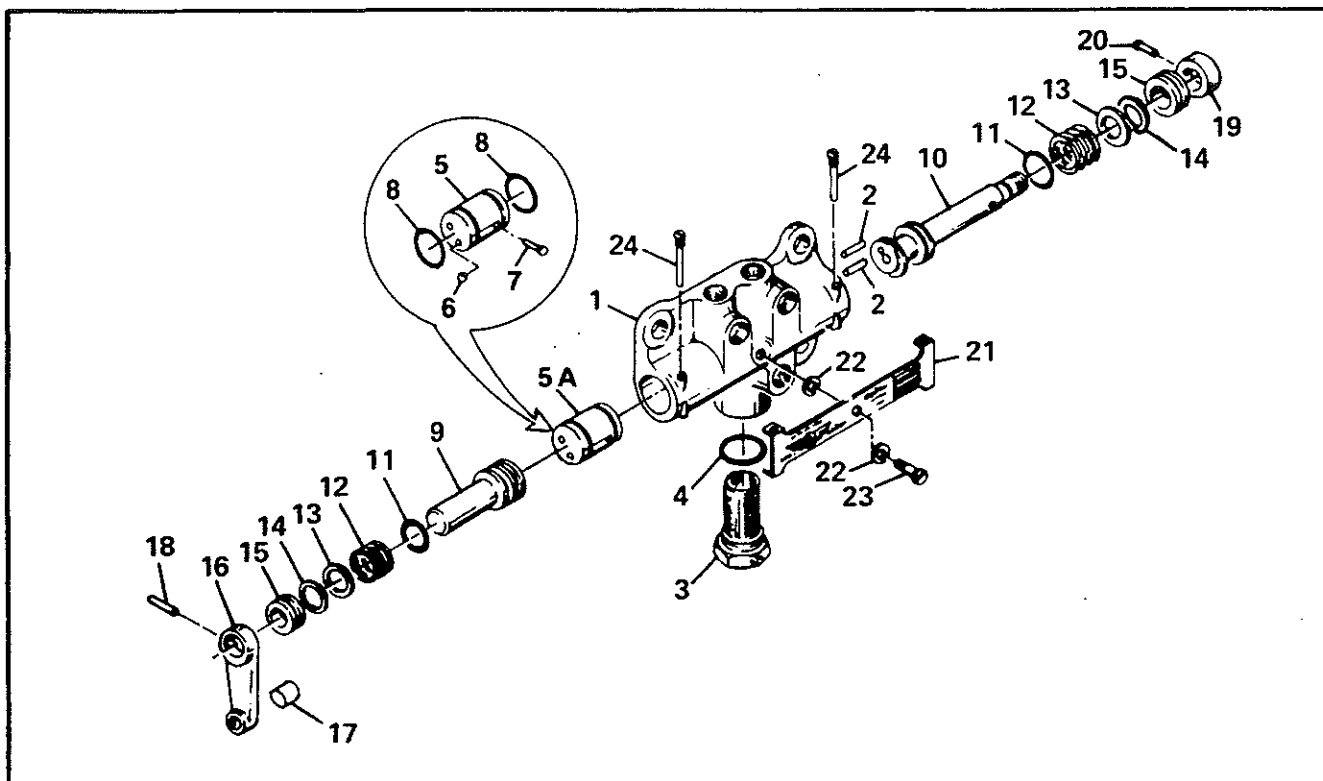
FUEL CONTROL ASSEMBLY
